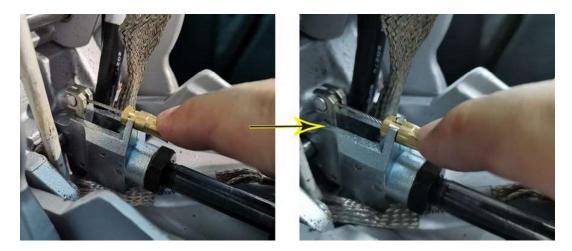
Ensure that copper head shoulder is located in the slot.
